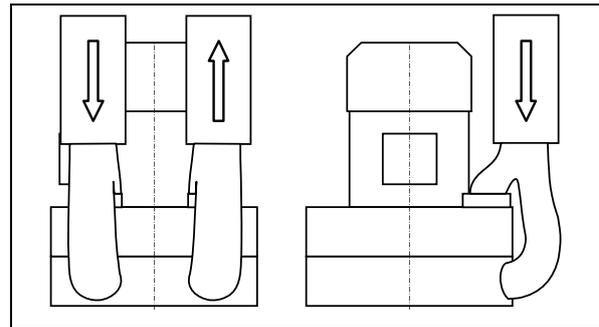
2BH1943 (two-impeller pump-motor unit with double-flow design)
